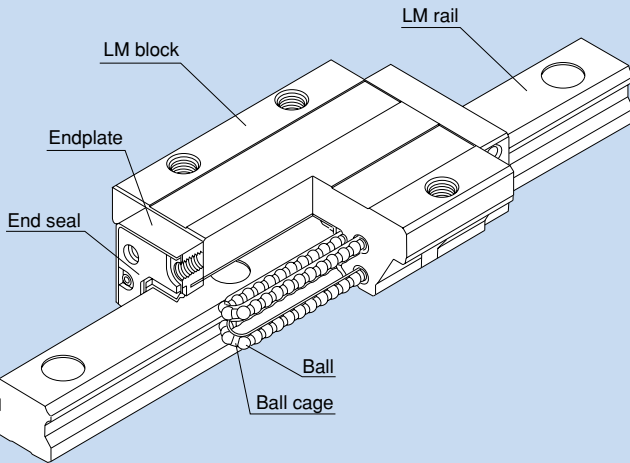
Structural Drawing of the Caged Ball LM Guide Model SHS
